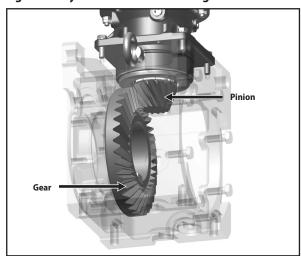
Cyclo® BBB4 Bevel Gearing Tooth Count
